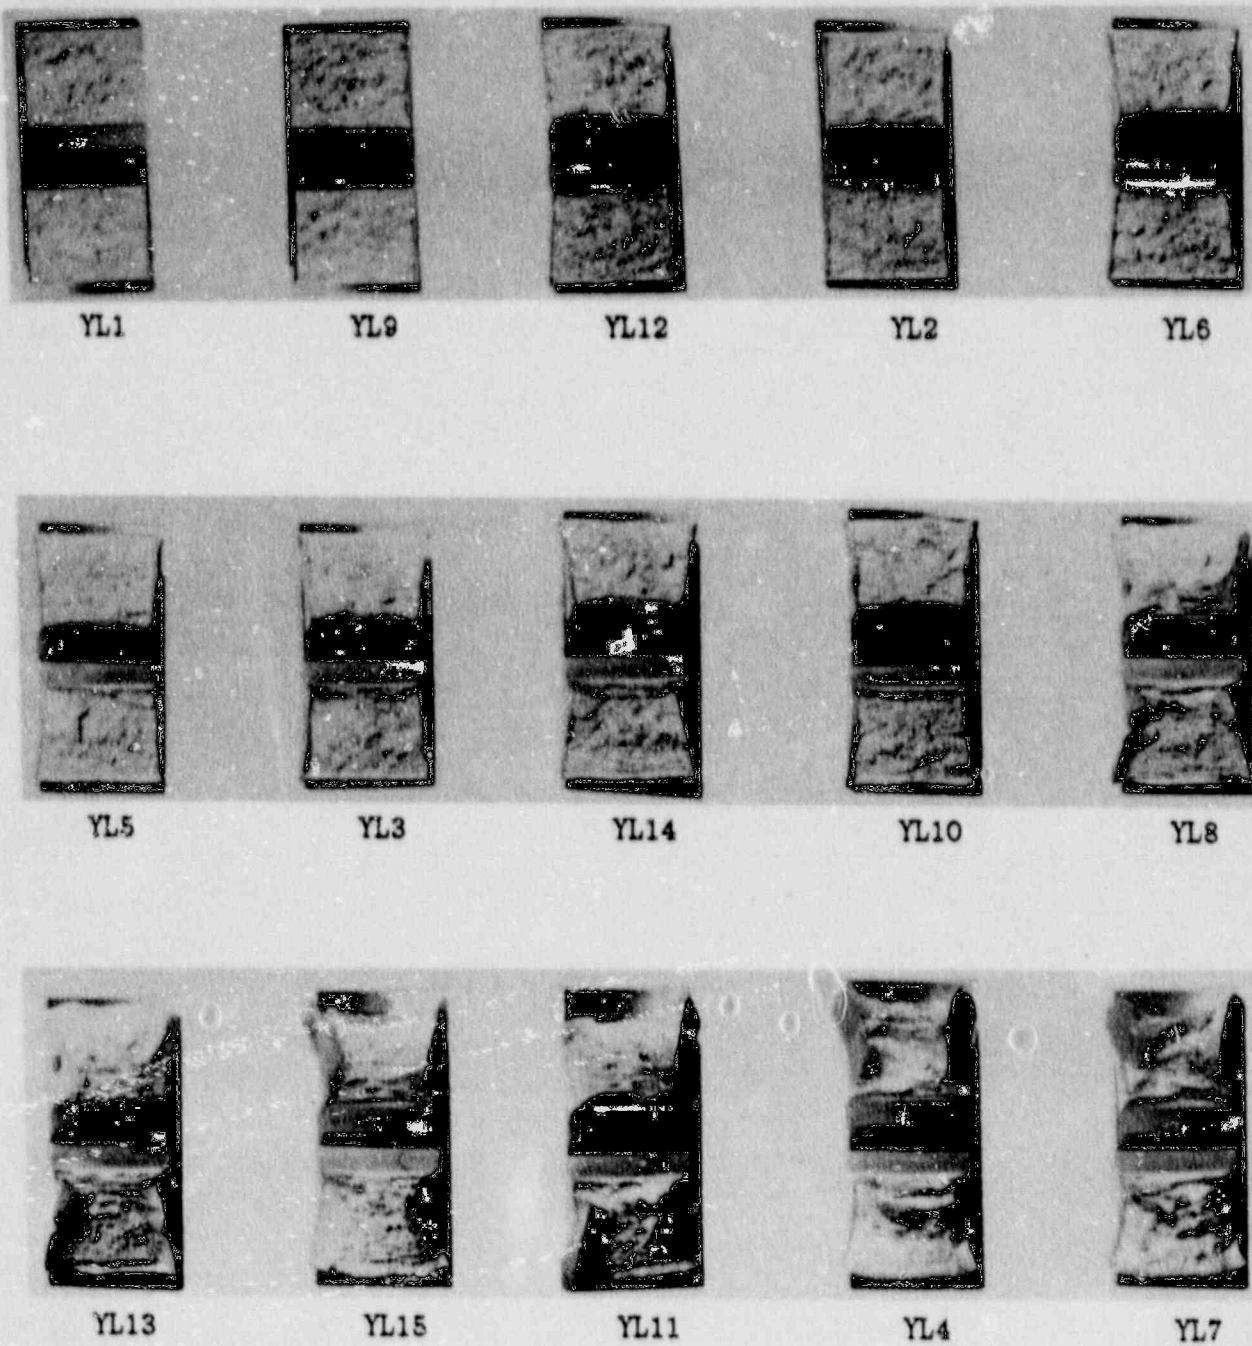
Charpy Impact Specimen Fracture Surfaces for Byron Unit 2 Reactor Vessel Shell Forging MK24-3 (Tangential Orientation)
